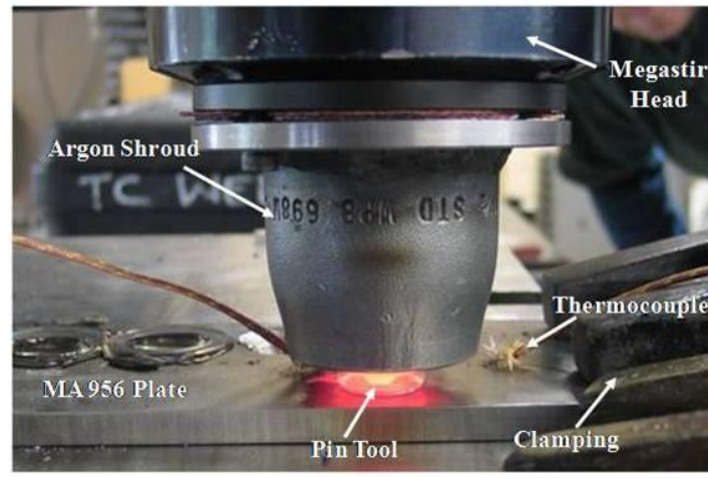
The MTS ISTIR 10 Gantry Intelligent Stir Welding machine's W-Re pin tool is pictured welding our MA956 parent material.
